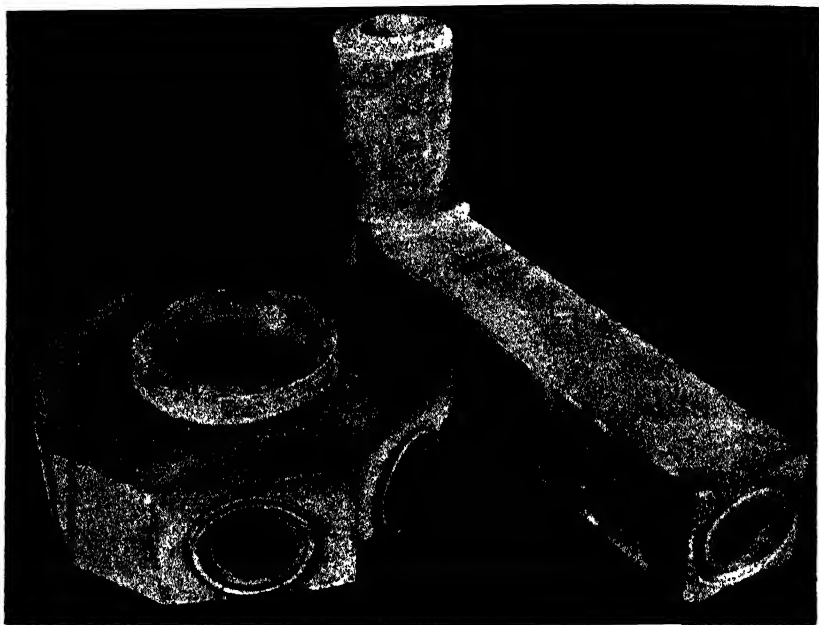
Arrangement of guide tubes, centre brick and runners for bottom pouring. One ingot mould only is shown.
